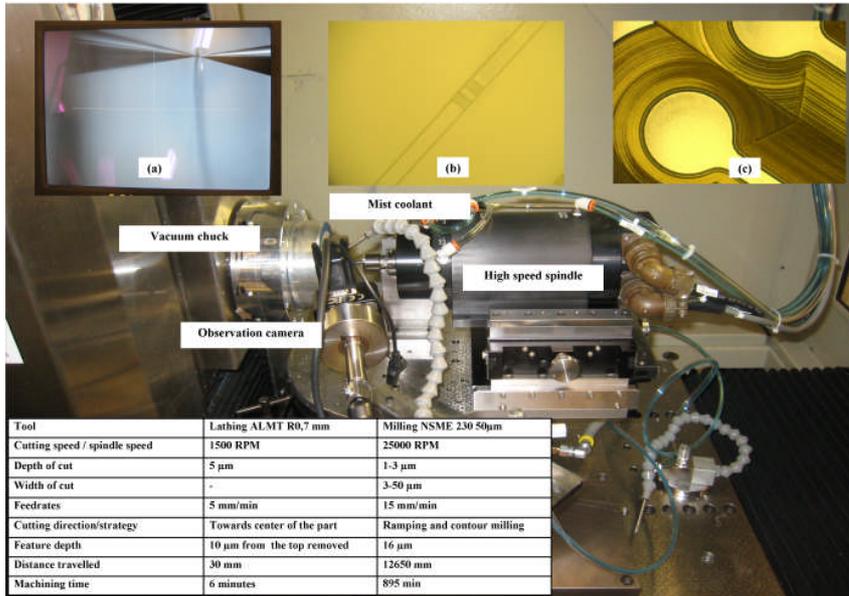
Machining set-up: observation camera view (a), in-machine tool micro-scope views (b-c) and cutting values
